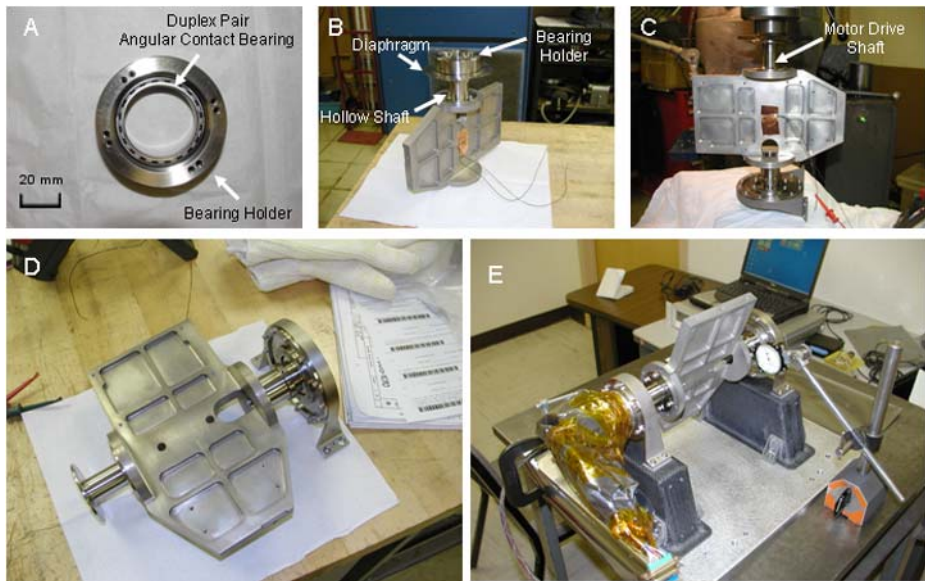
Sequence of steps resulting in the precision drive train of the MDIS pivot assembly. (A) Duplex pair of angular contact bearings pressed into bearing holder. (B) Hollow shaft press fitted into the diaphragm and bearing assembly. Shaft then press fitted into platform assembly. (C) Motor shaft pressed into platform. (D) Completed drive train of platform, prior to integrating onto composite stands. (E) Verification of rotational trueness (runout)
